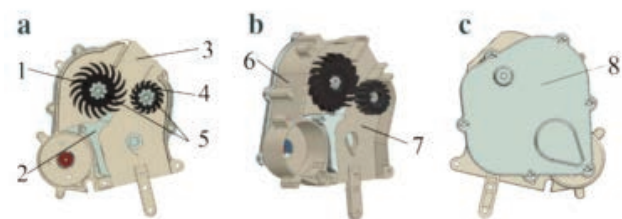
Structure characteristics of the seed-picking mechanism. a) Front view; b) axonometric view; c) back view. 1) Primary feeder wheel; 2) seed cleaning claw; 3) seed-picking entrance; 4) auxiliary feeder wheel; 5) gear shafts; 6) gear box; 7) front shell; 8) rear cover shell.
